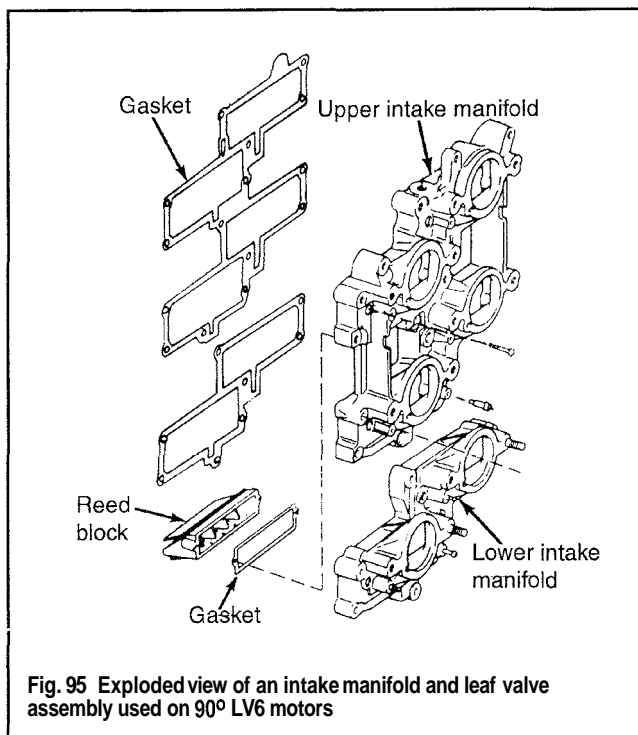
Exploded view of an intake manifold and leaf valve assembly used on 90° LV6 motors
